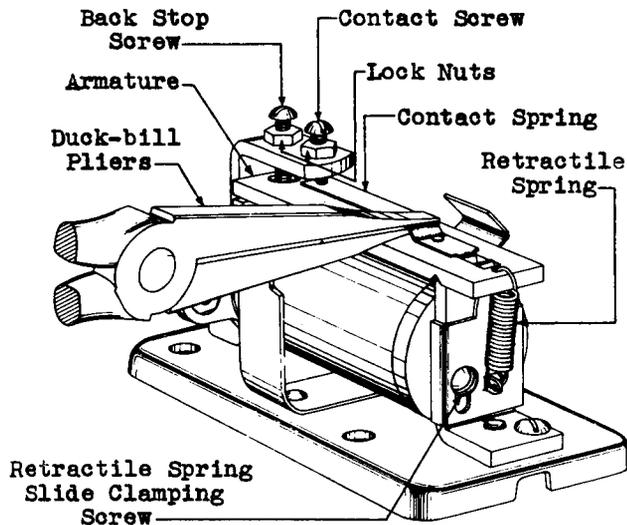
Method of Adjusting Contact Springs with Duck-bill Pliers
